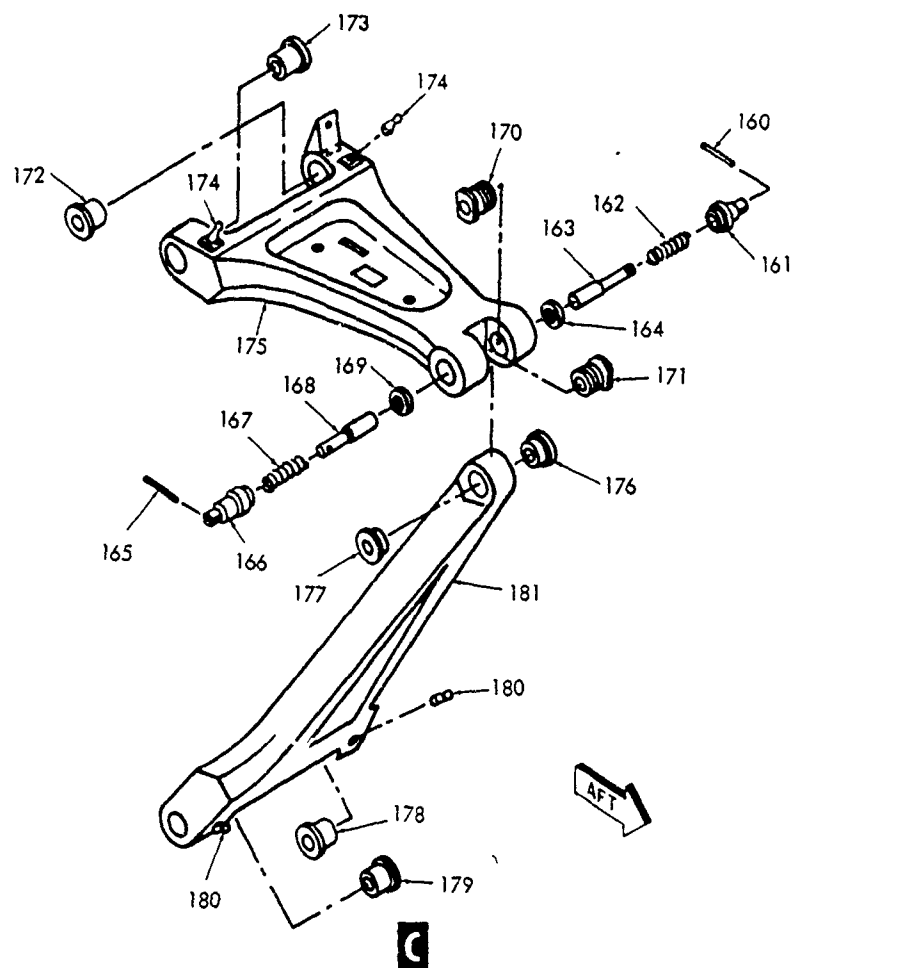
Nose Landing Gear - Exploded View (Sheet 3 of 7)
